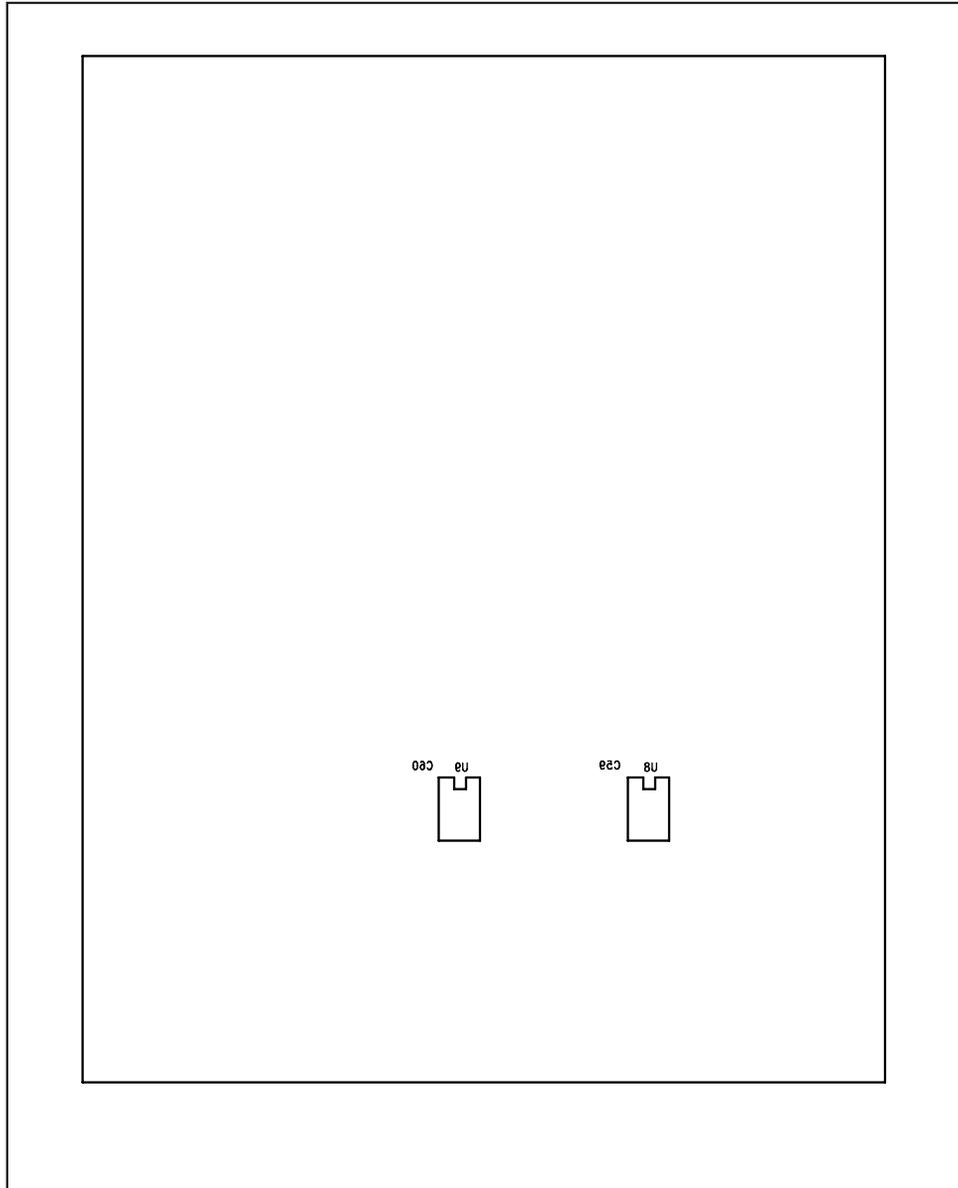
MAX2830 EV Kit PCB Layout—Bottom Silkscreen
